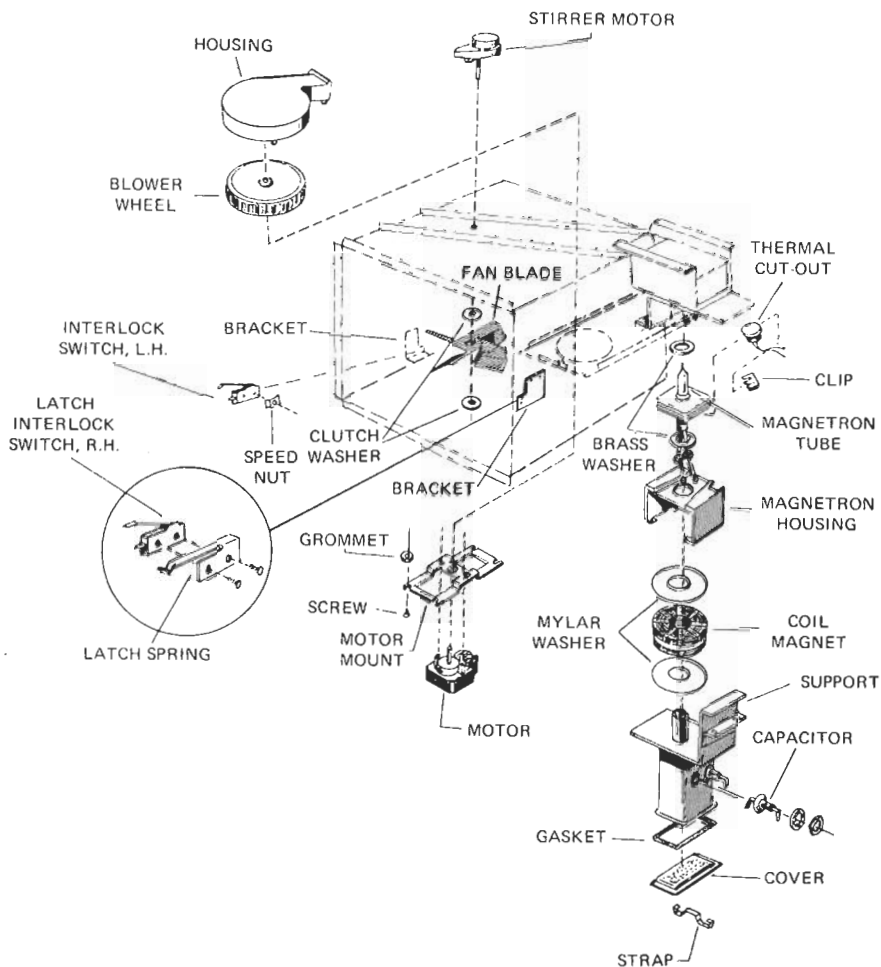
EXPLODED VIEW of typical microwave oven and magnetron assembly. You'll need this sort of information when removing a defective magnetron and installing a new one.
